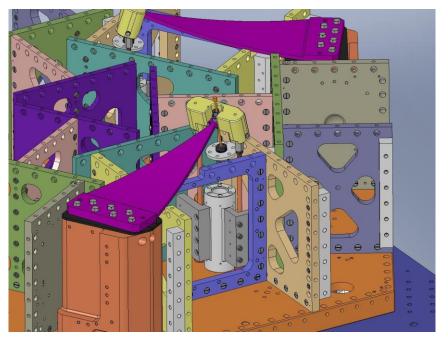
Engage the Pull-Down Cap with the end of the Spring. The (2) dowel pins in the Cap should seat in the matching Spring holes.
